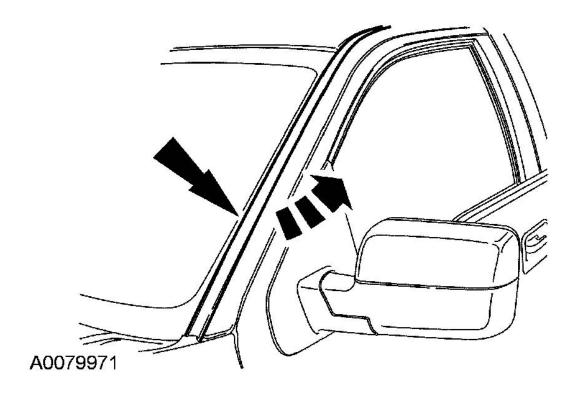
Pressing And Hold Inside Edge Of Roof Ditch Moulding Away From Centerline Of Vehicle Courtesy of FORD MOTOR CO.
